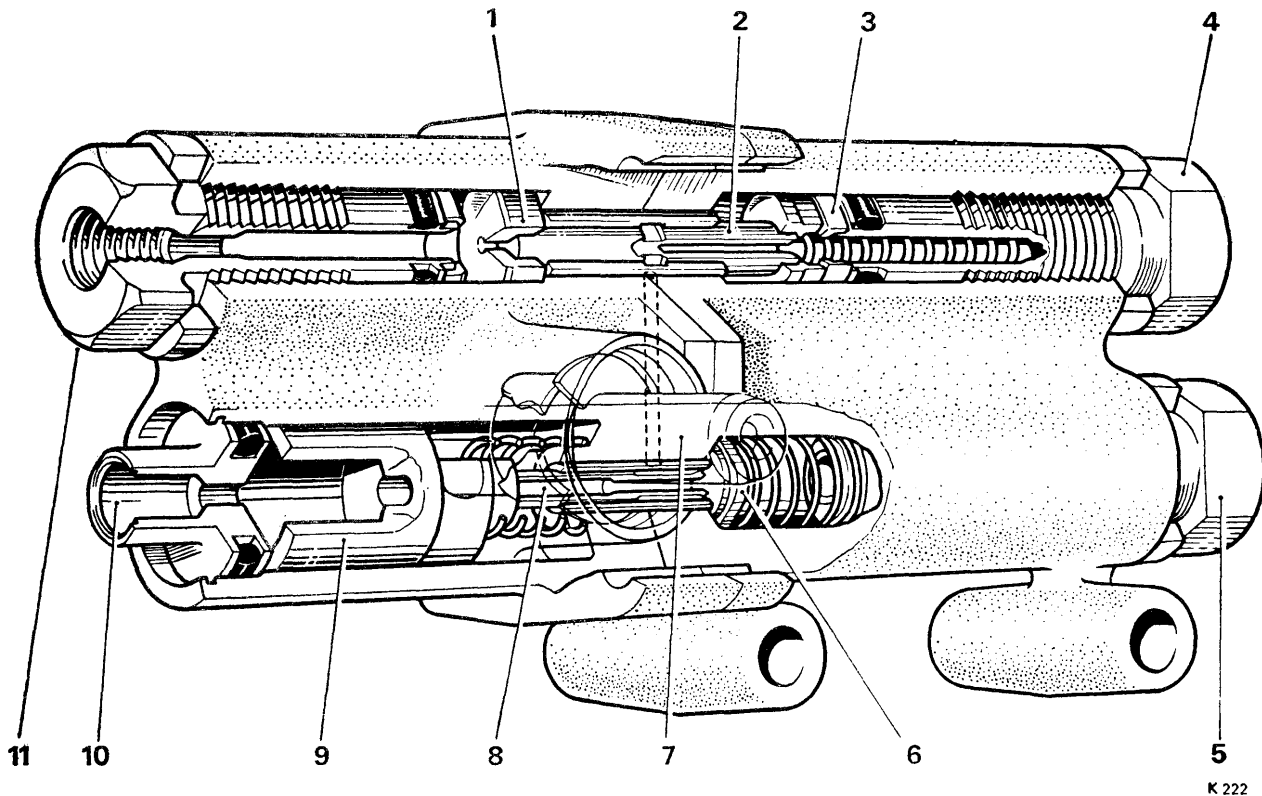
CUT-AWAY VIEW—REAR HEIGHT CONTROL VALVE
